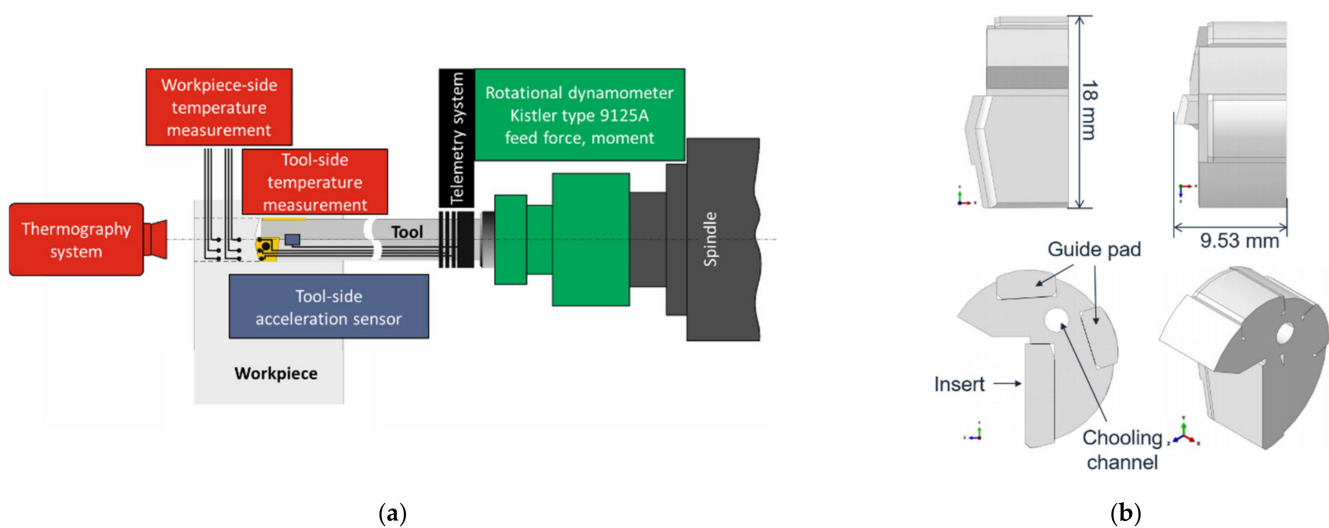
Schematic representation of the experimental setup for SLD (a) and CAD of the single-lip deep drill with a changeable insert and guiding pads from the company Gühring AG for the FEM simulation (b).
